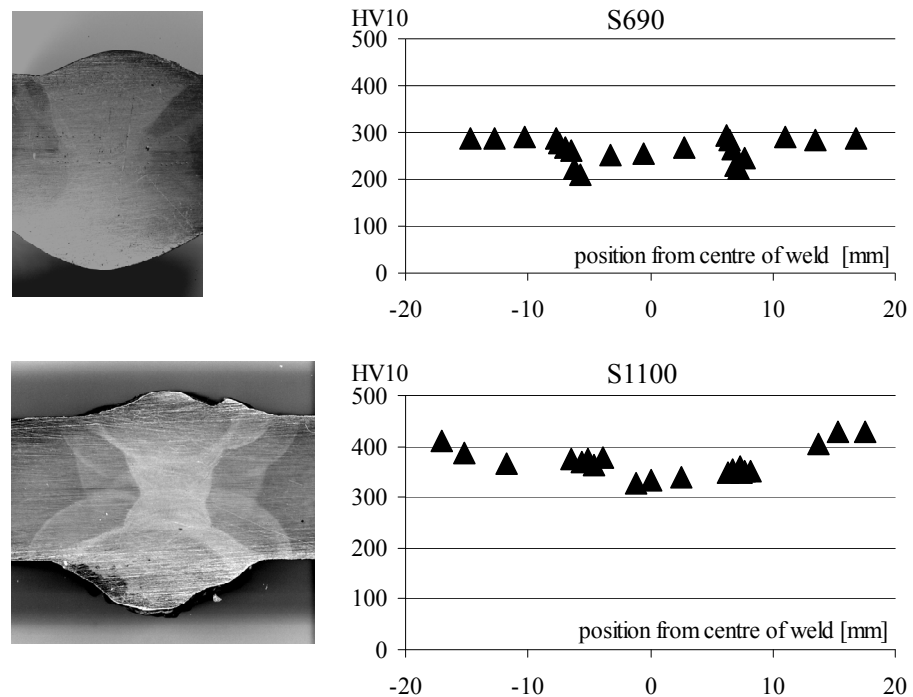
Cross Section of S690 and S1100 Welds and HV10 Values at 2 mm below the Specimen Surface
